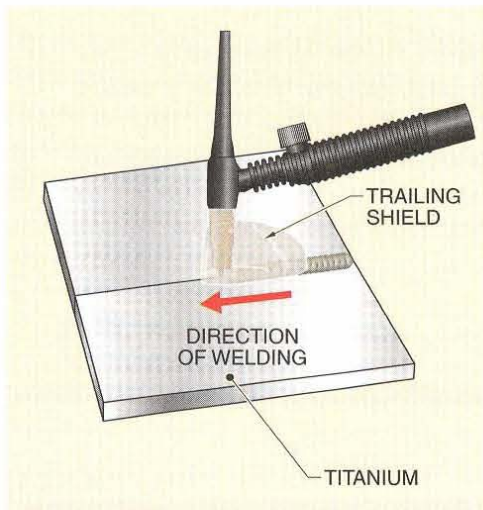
The metal cooling from welding temperature must also be protected by a trailing shield.
